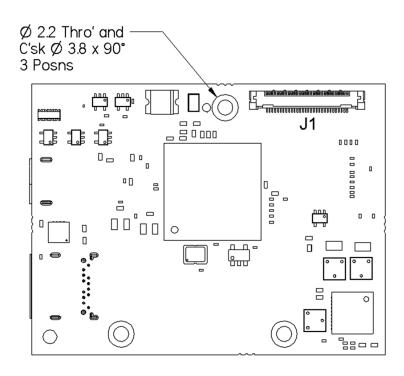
Mechanical overview, side A (Note – when mounted on a camera, this side faces away/out from the camera)
